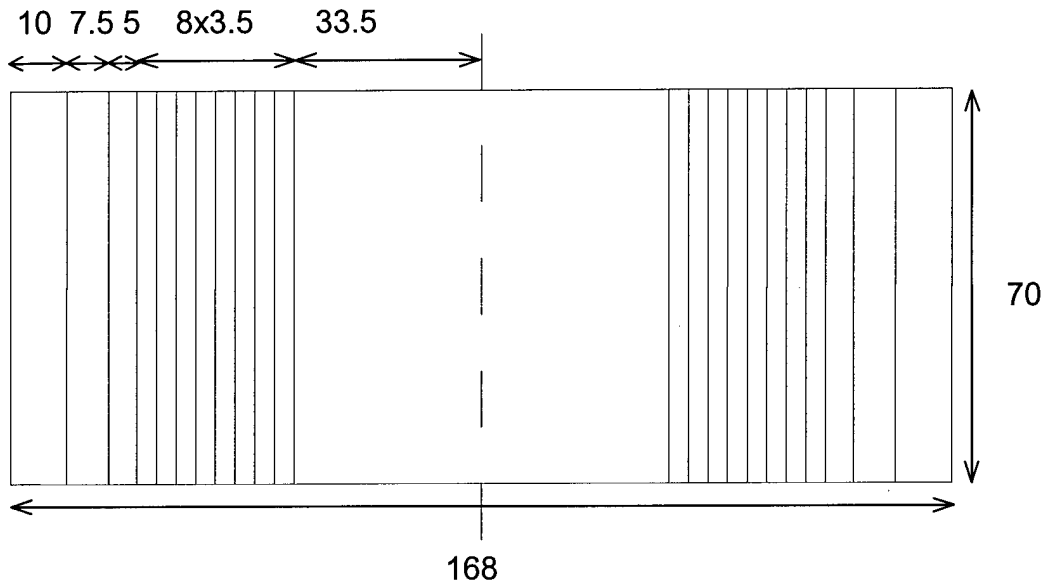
Boron-epoxy patch for skin side (all dimensions in mm).
